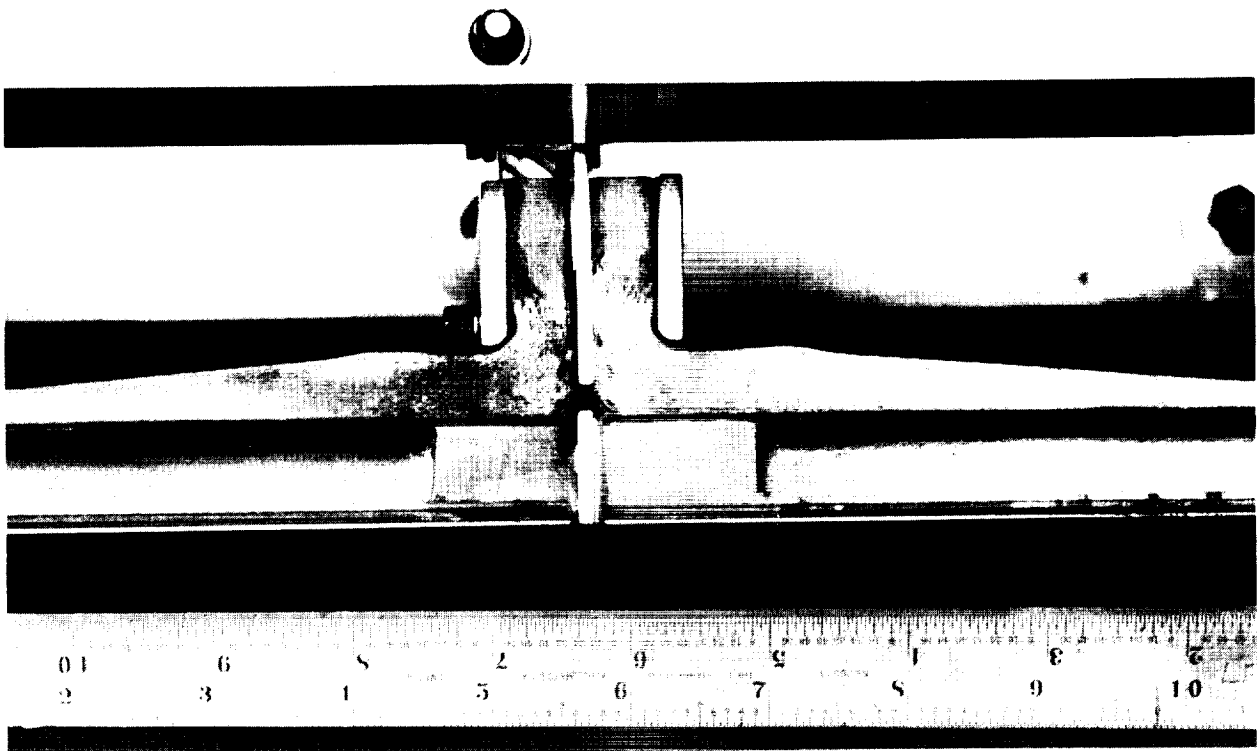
CLOSE-UP OF MODIFIED JOINT ASSEMBLY
